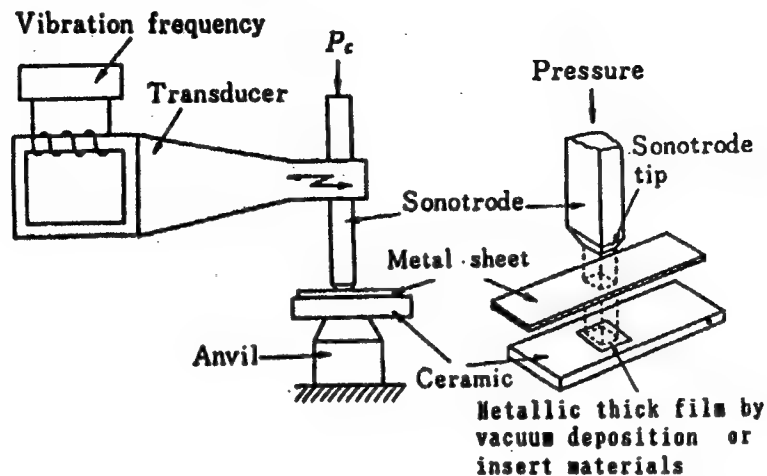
Ultrasonic Welding Machine and a Schematic Diagram of the Portions To Be Welded
